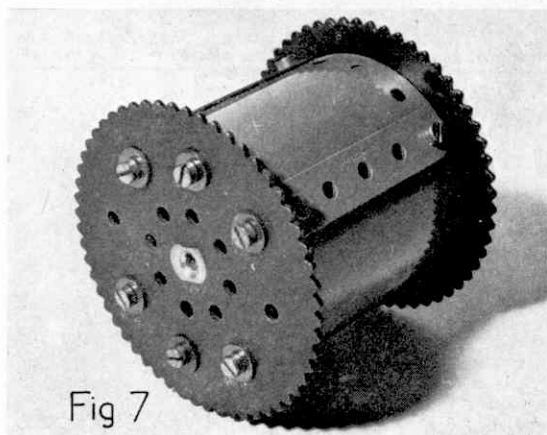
Large-diameter winding barrels can easily be built-up from curved Flexible Plates. Note the use of heavy-duty end cheeks, supplied by Sprocket Wheels in this case.
